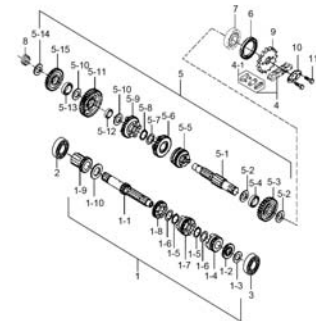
GEAR SHIFTING (P05-S160-0024)
